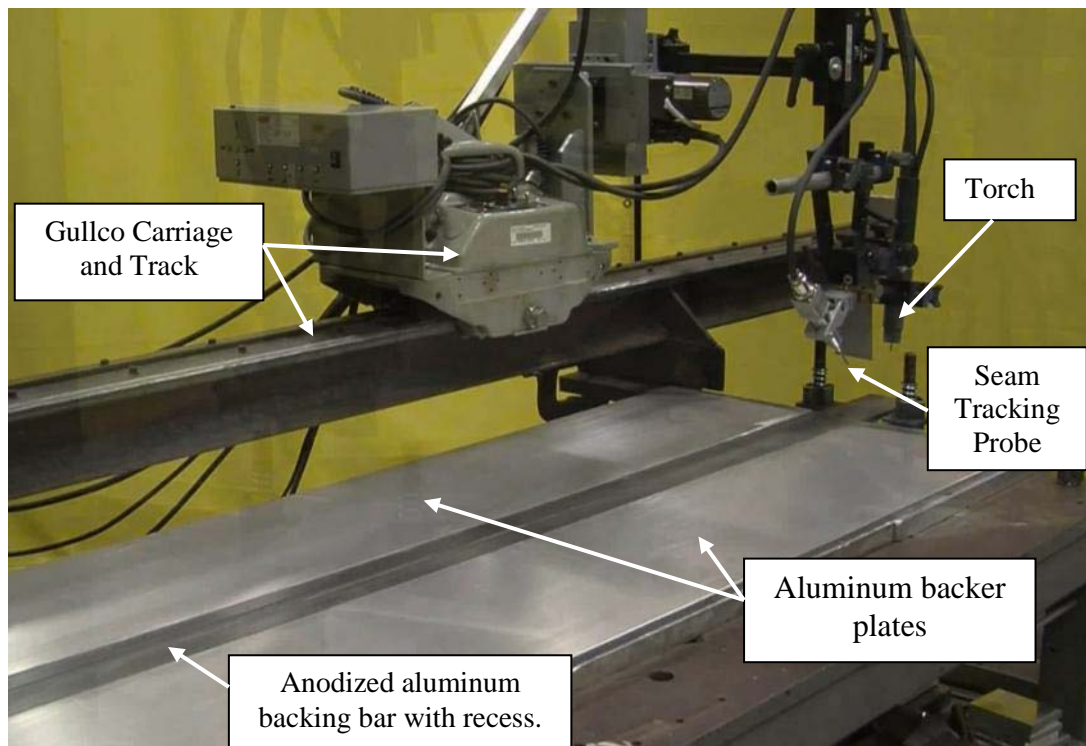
HDGMA Welding Station at ATC, prior to placement and clamping of the tack welded assembly.
